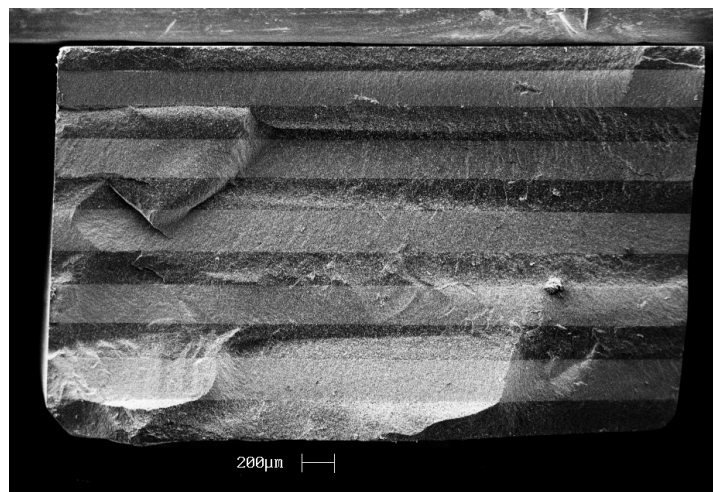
Electron Fractography of tested multilayer sample, showing that fracture started from the alumina surface layer.
